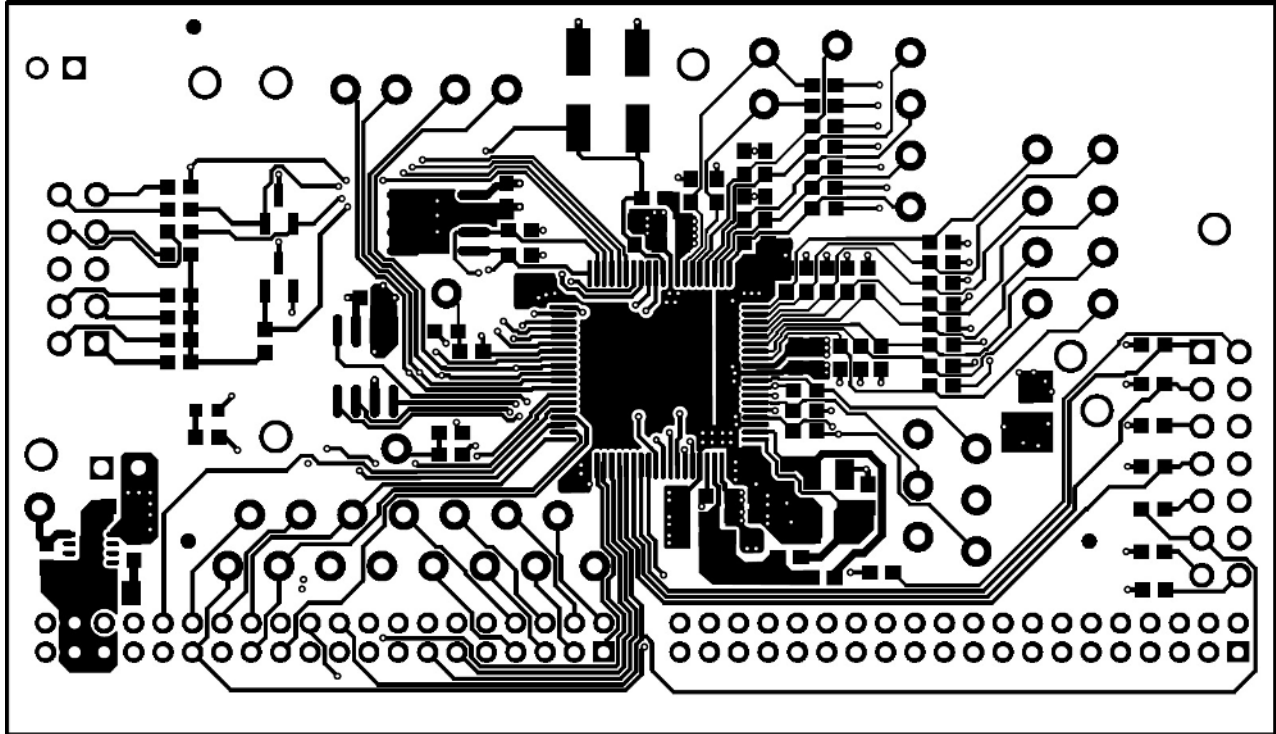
UCD3138A64EVM-660 Top Copper (Top View)
